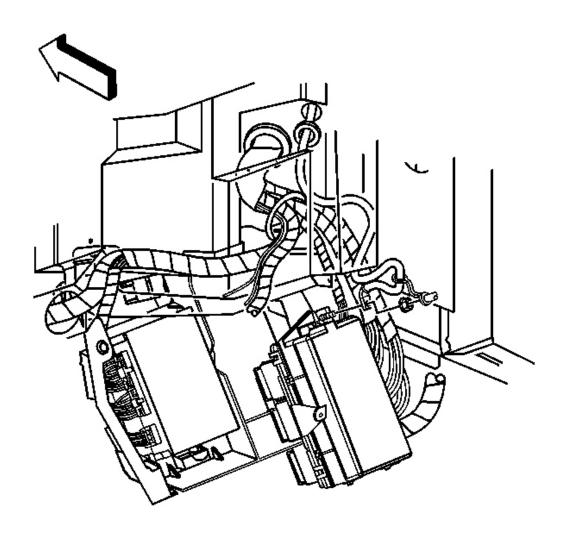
I/P Wiring Harness Junction Block & Nut Courtesy of GENERAL MOTORS CORP.
